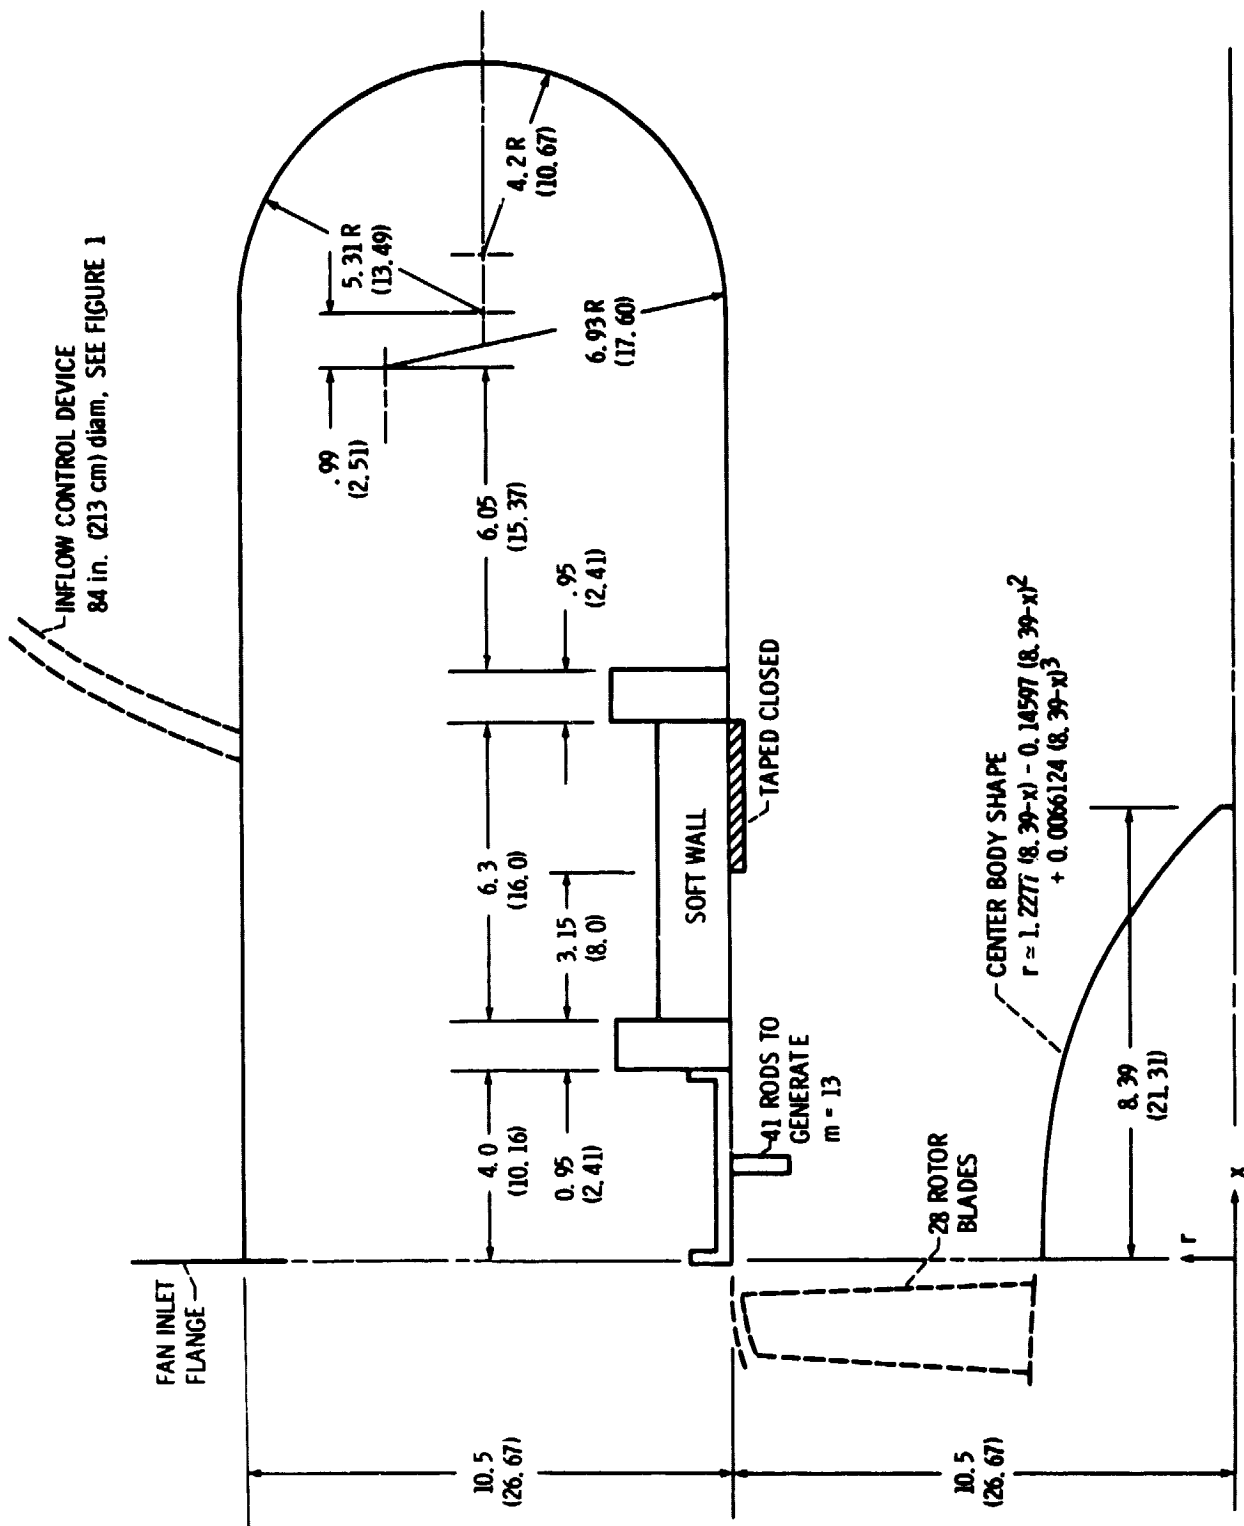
Test configuration of JT15D engine inlet used for single mode SDOF suppressor experiments, dimensions in inches (cm).
